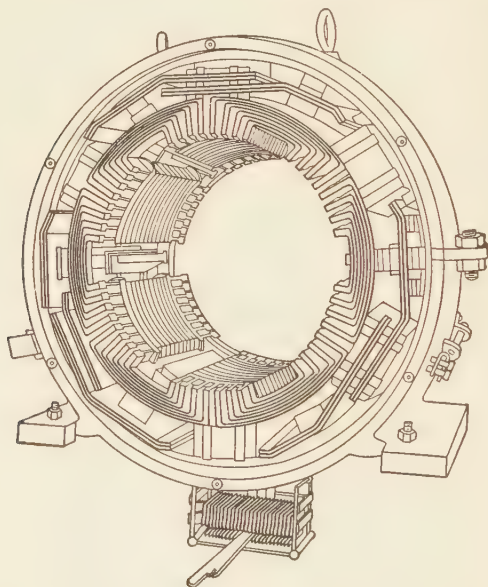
Appearance of compensating windings. *Westinghouse Electric & Mfg. Co.
